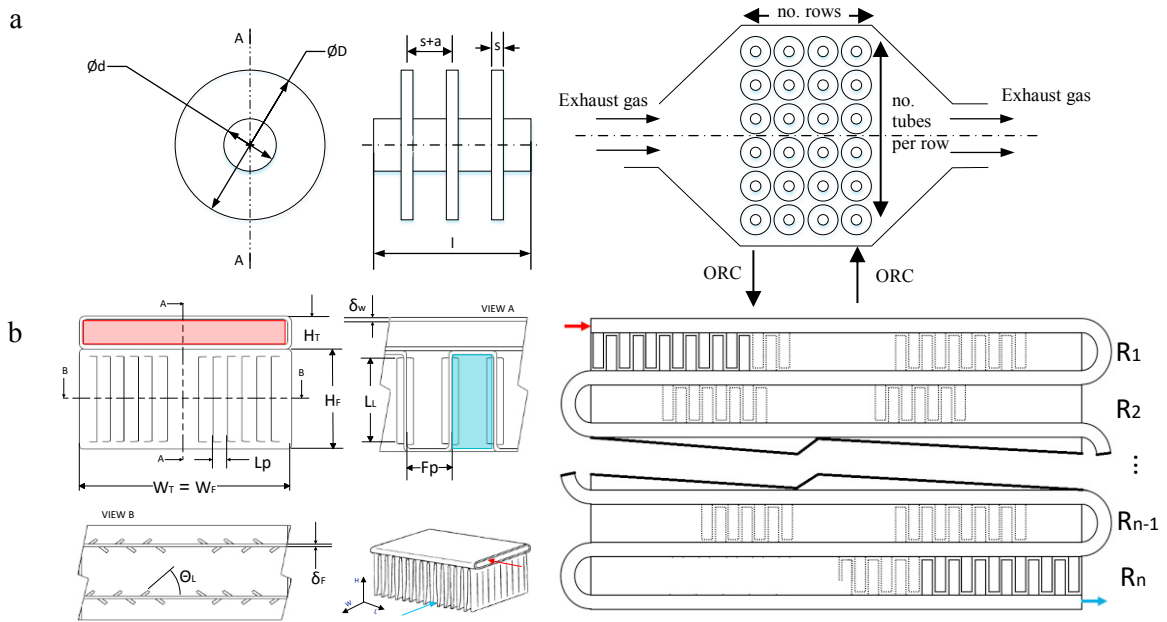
(a) Finned-and-tube evaporator. (b) Finned flat-tube air-cooled condenser.
